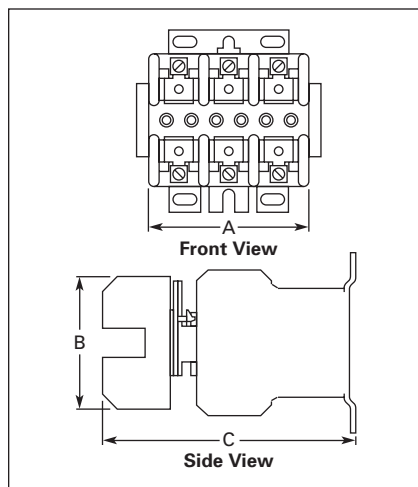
3-Pole Fuse Block and Contactor Dimensions
